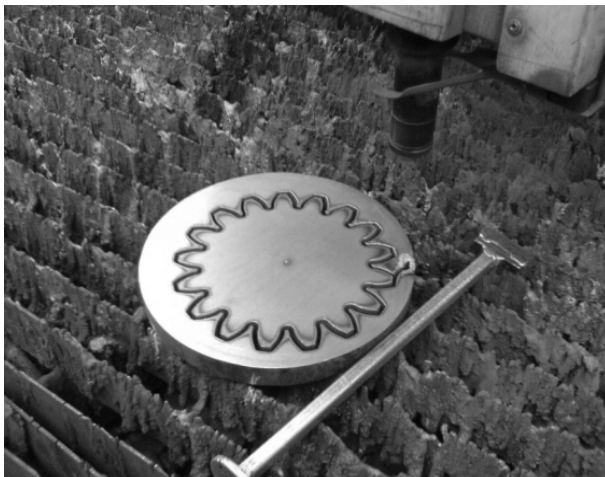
Gear-wheel cutting by plasma Formica Nitra, For CUT 203 WDM
